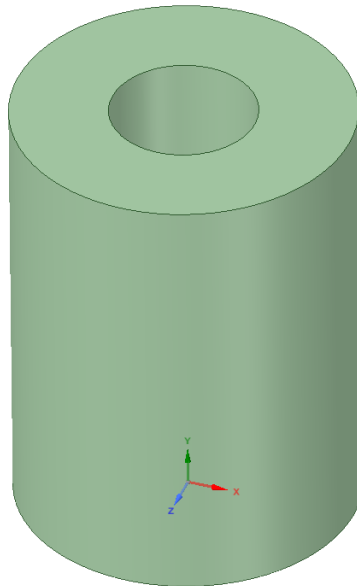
A-5 CAD drawing of the rubber buffer which was simulated in ANSYS.
